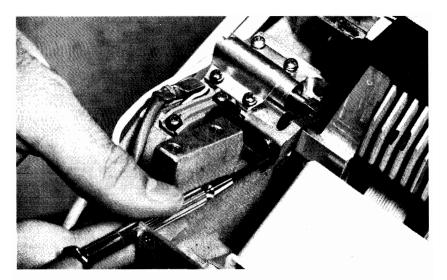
Position Transducer Adjustment (Shown with Ribbon Motor Assembly removed)
